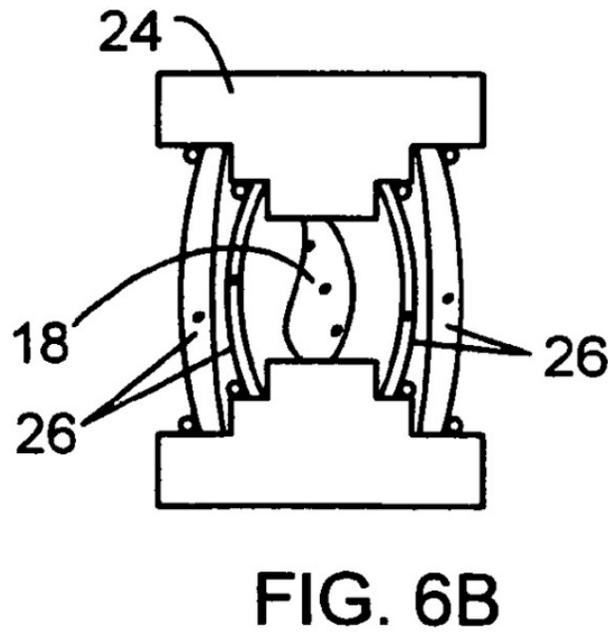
An example showing an infrared freeform lens molded into its mounting cell, then combined with other components.
